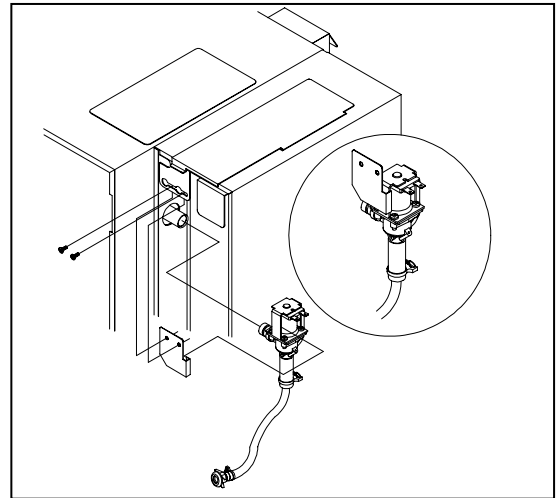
Install the valve onto the "T" inside A.P.P. Inset shows valve plate already mounted.
